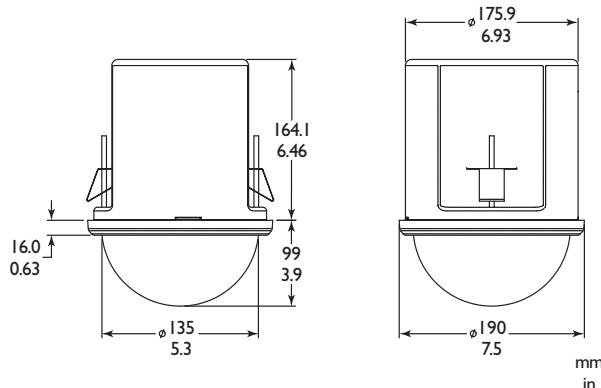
Dimensional Outline (Camera Module Assembled in Backbox)
